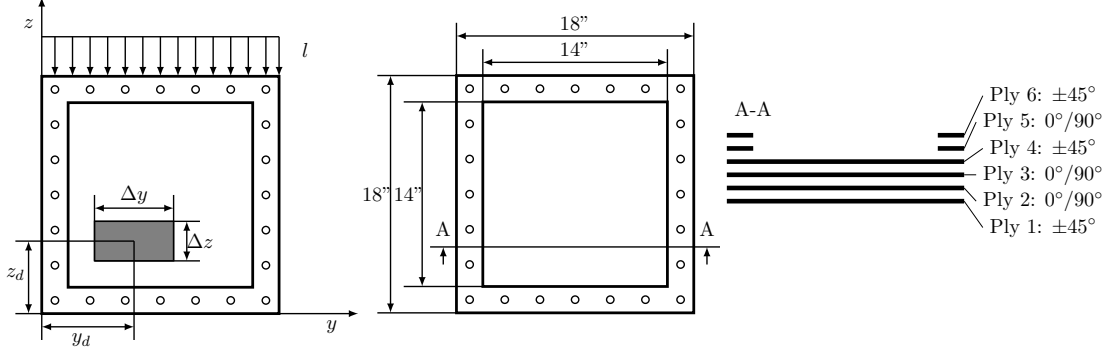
Panel parameters (damage location and damage size) and loading definition. Panel layout and layers sequence.
